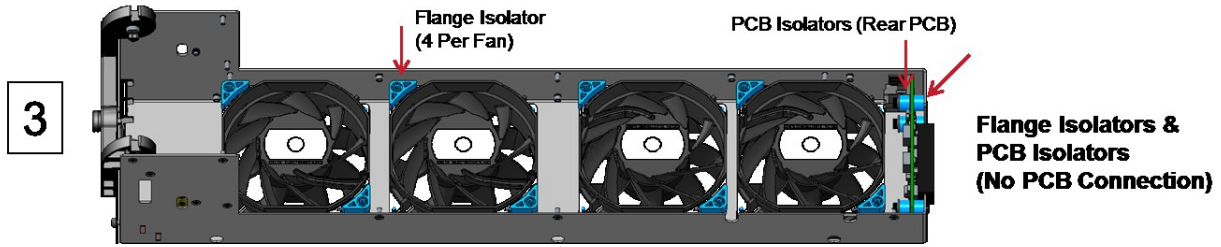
GEN2A with AHBM Test Case #3: Flange & PCB Isolators (Float PCB)
